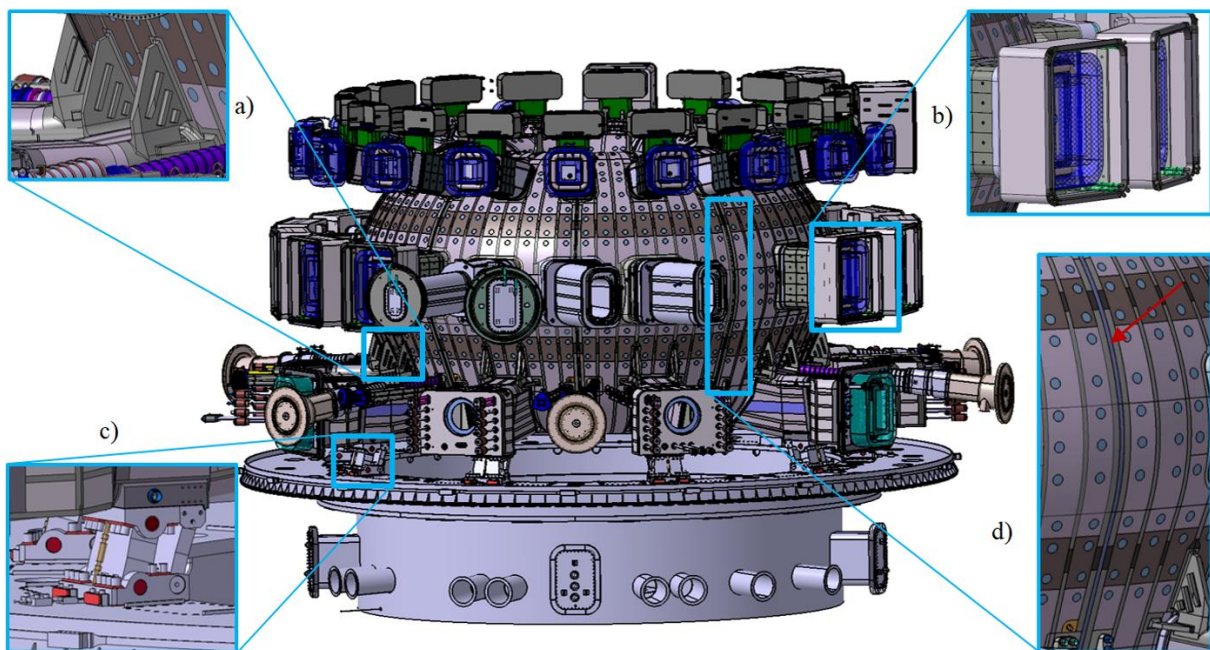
Vacuum vessel outer inspection areas: a) lower port gussets b) lip seal welds, c) gravity supports, d) outer field welds
